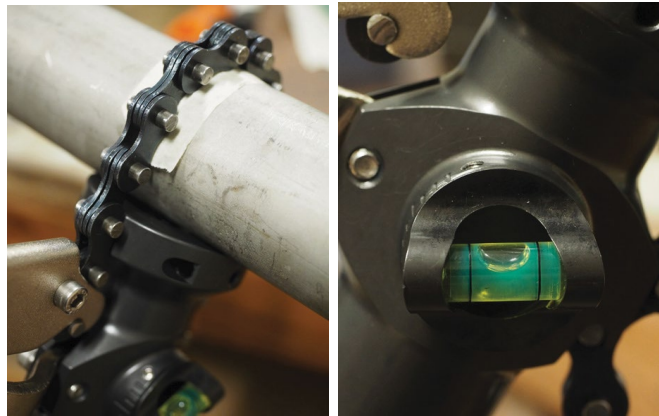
6.5 Align clamp body with the tape and engage the chain hook and clamping chain. Ensure the level bubble remains centered.
